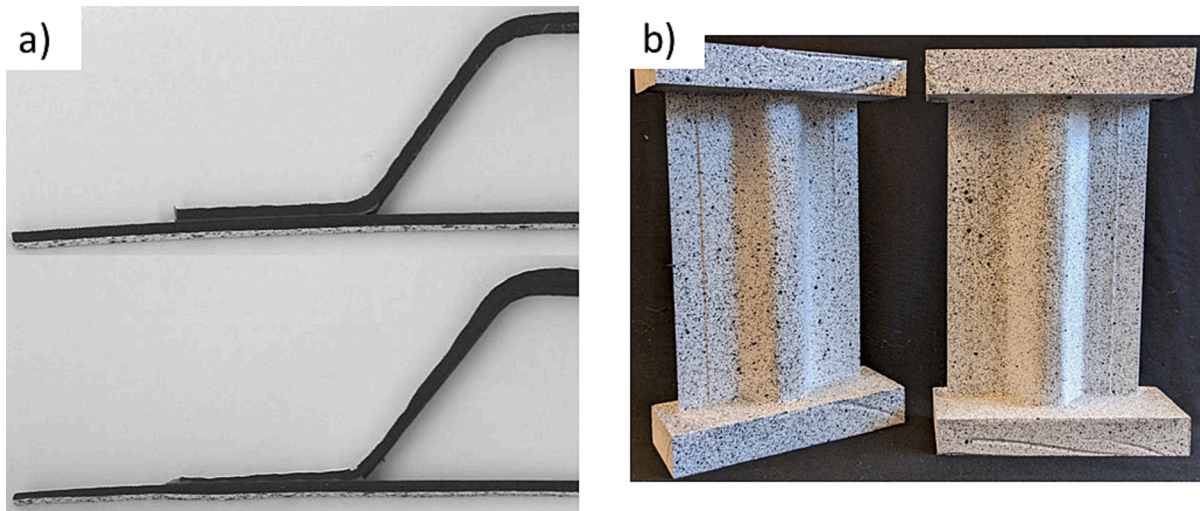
(a) Cross-Section Cut of the Control (top) and Tapered (bottom) Specimens, (b) two Single Stringer Specimens.
